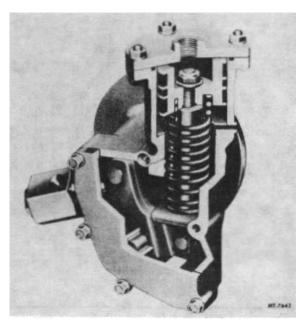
Forward Rear Axle Z-Speed Air Piston Shift Unit.
